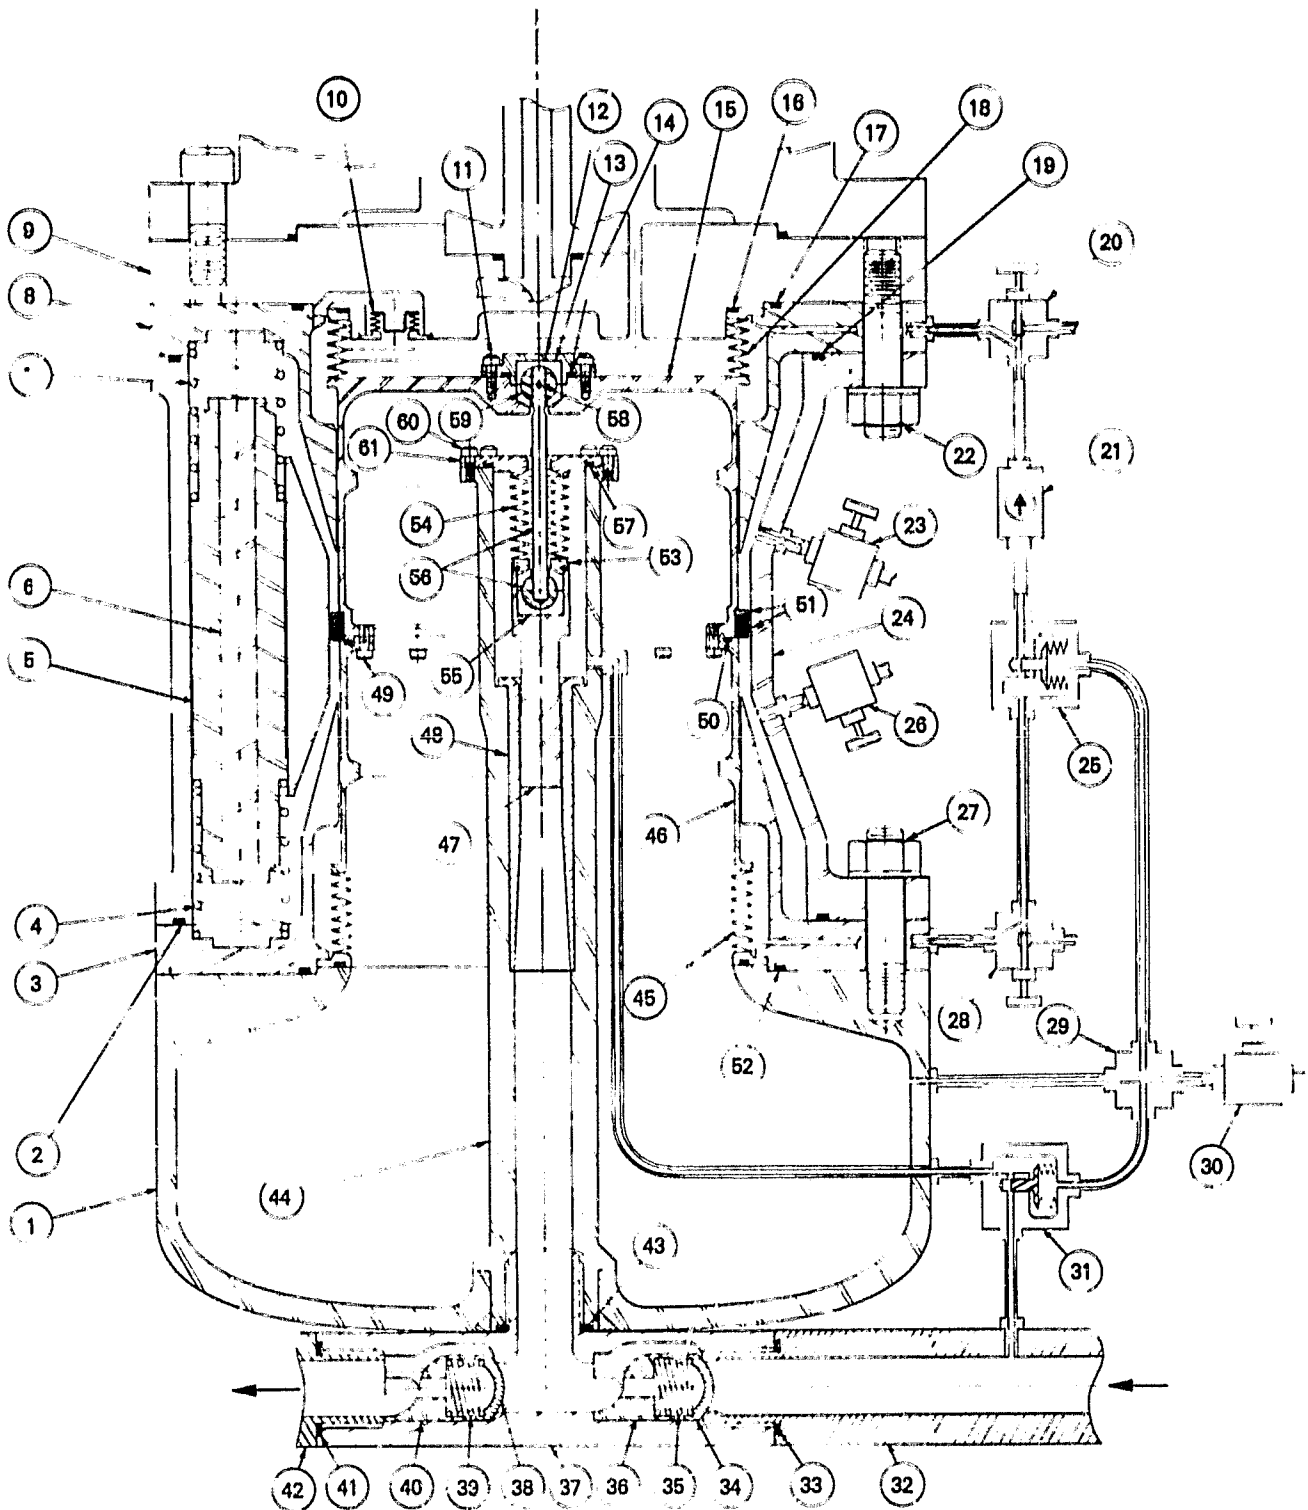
Hydraulic Converter Layout with Component Identifiers.
